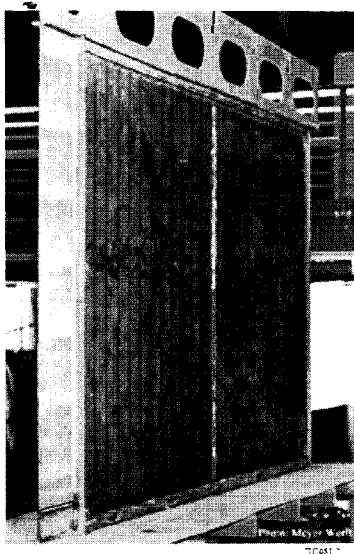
Actual applications of laser welded sandwich panels as wing bulkheads
